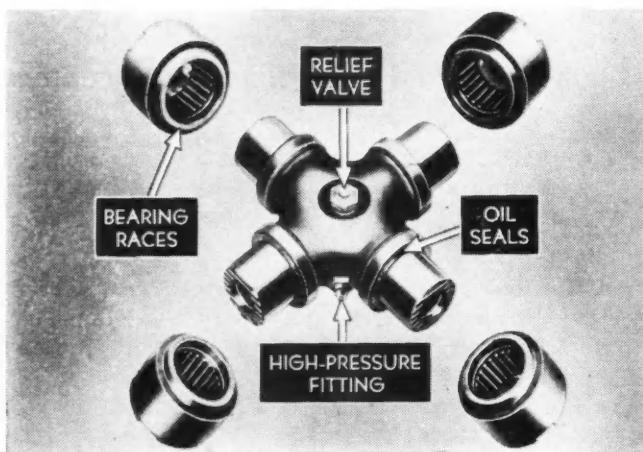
When re-installing propeller shafts, one new cork gasket oil seal should be placed on each of the trunnion shoulders ahead of the needle bearings.
